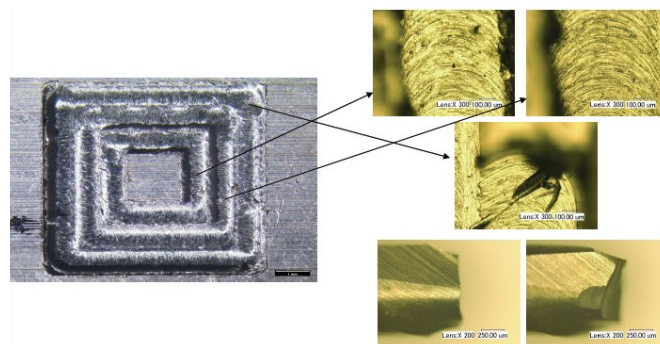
Machining of Aluminium at $f = 40$ mm/min, D.O.C. = 0.4 mm (Run #1 in Table 2): Image of Pyramid Shaped Structure (at left), and the Magnified images of Micro Slots (top right), and Cutting Tool (bottom right)
